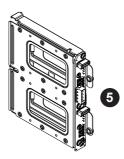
Installing the Backplane onto the Hard Drive Cage
